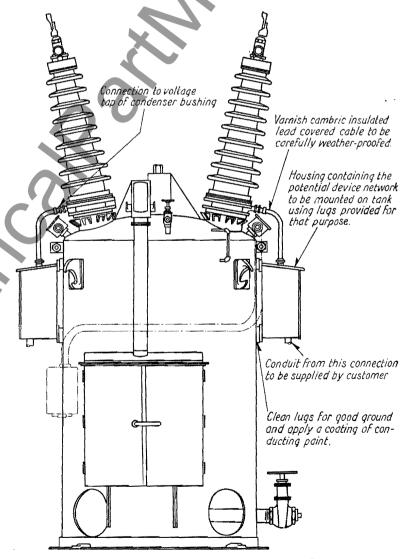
Condenser Bushing Potential Device Mounted on Breaker Tank
